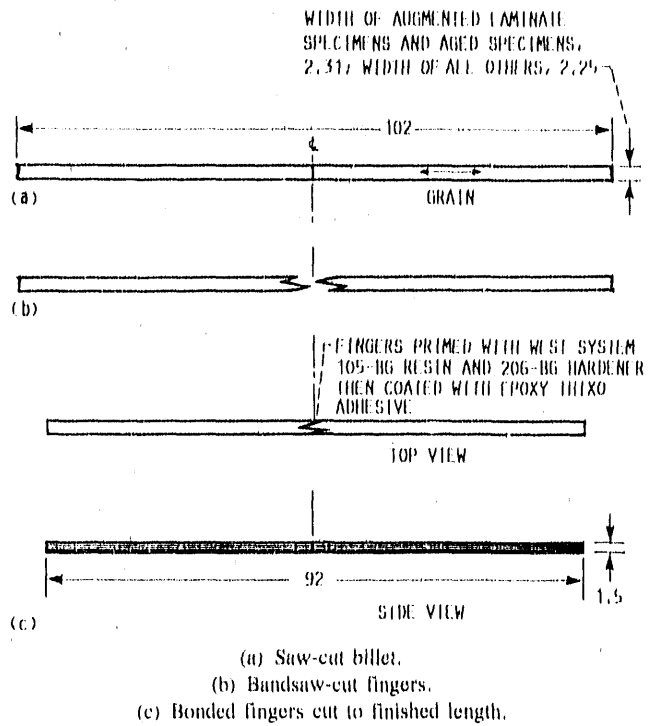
Fabrication of finger joint tensile test specimens. (Dimensions are in inches.)
